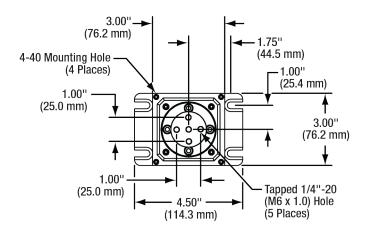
Mechanical drawing showing holes for mounting an MPM250 to a PLSXY stage.
